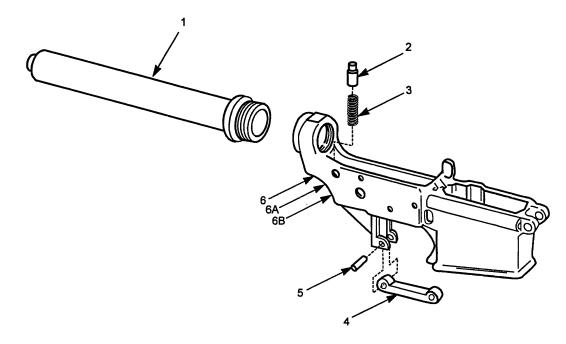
Lower Receiver and Receiver Extension Assembly (M16A2) 9349101, (M16A3) 12012002, and (M16A4) 12598102.
